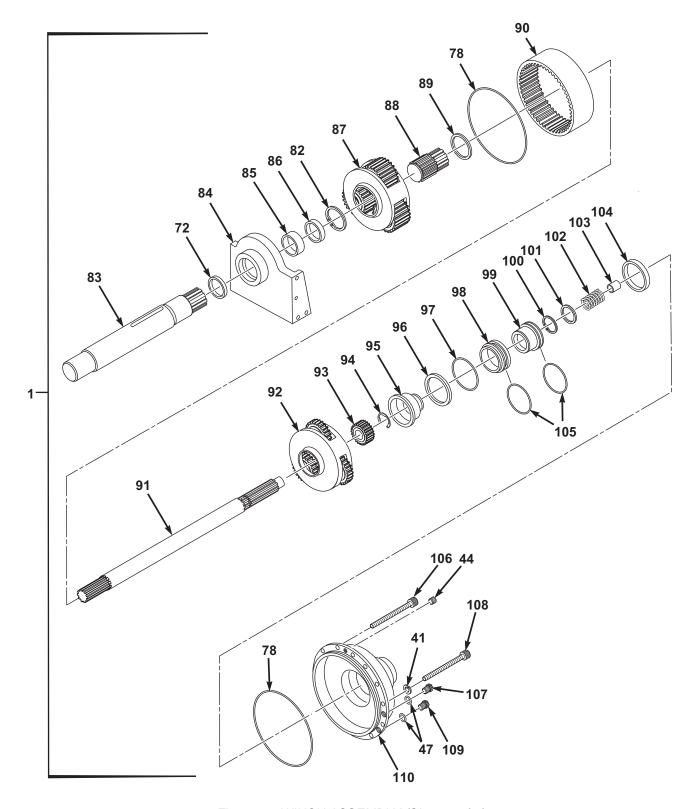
WINCH ASSEMBLY (Sheet 4 of 5)
